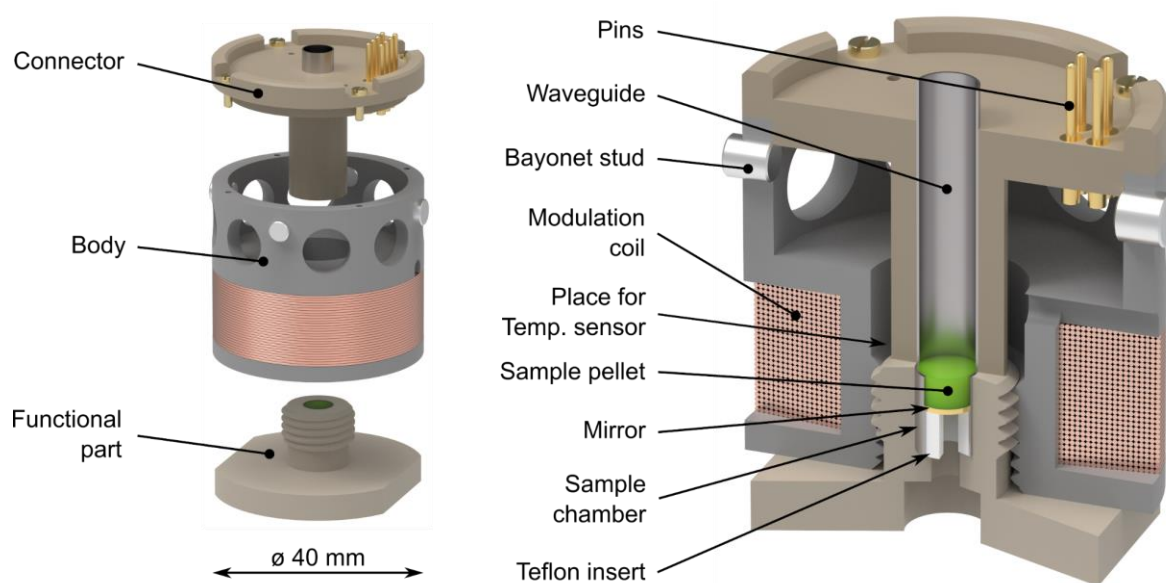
Design of the pellet sample holder – disassembled into the main parts (on the left) and sectional view containing annotations of all parts (on the right).
